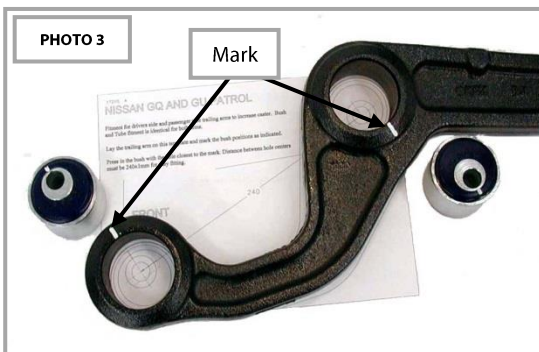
Remove the front trailing arm and press out the two trailing arm to differential bushes. Lay the arm on the template provided, and scribe the alignment marks as shown in photo. This will be the guide for locating the offset bushes.
